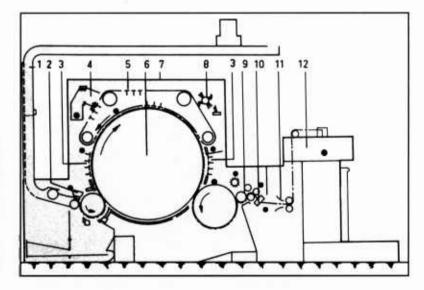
Front end of a Rieter E7/6 comber (courtesy of Rieter Machine Works, Ltd.)
